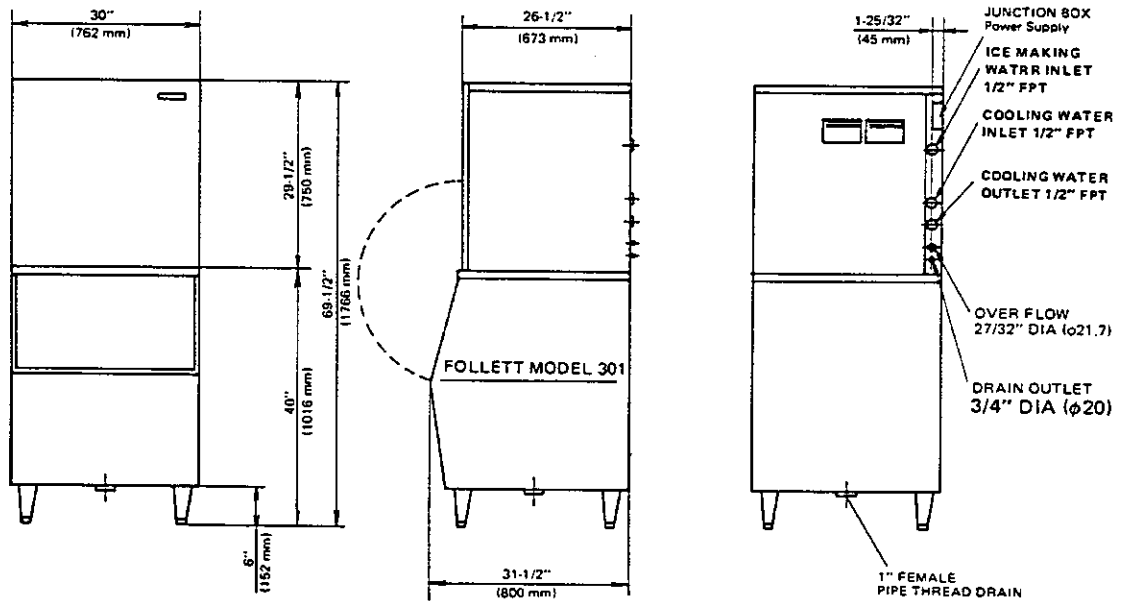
Dimensional drawing for Ice Storage Bin Optional
